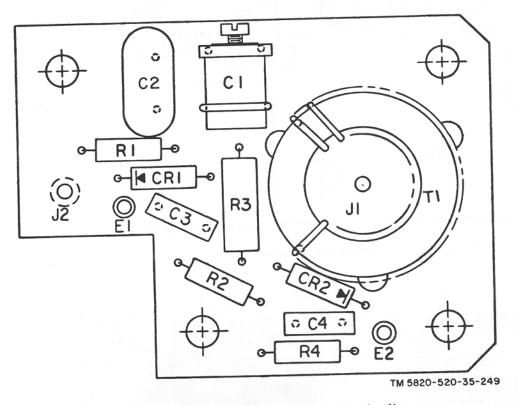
Printed circuit board 2A4A2, parts location diagram.
